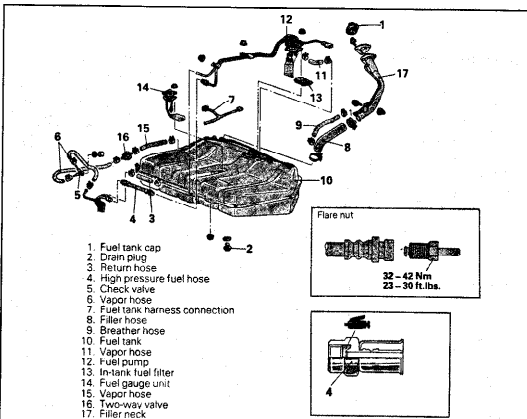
Fuel tank and related components exploded view—1990-92 Mirage
